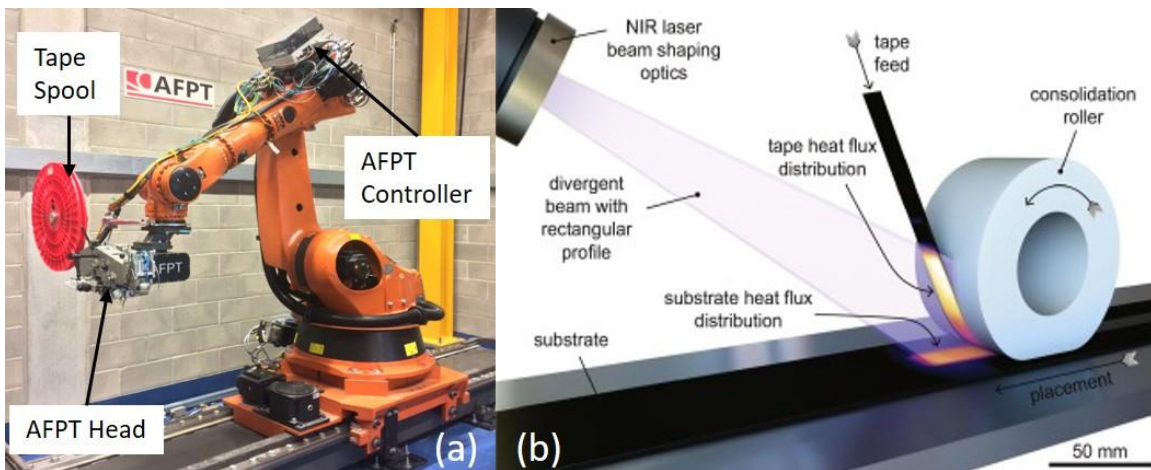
a), LAMP head & Kuka Robot b), LAMP process showing laser, tape feed, substrate & roller.¹⁶
